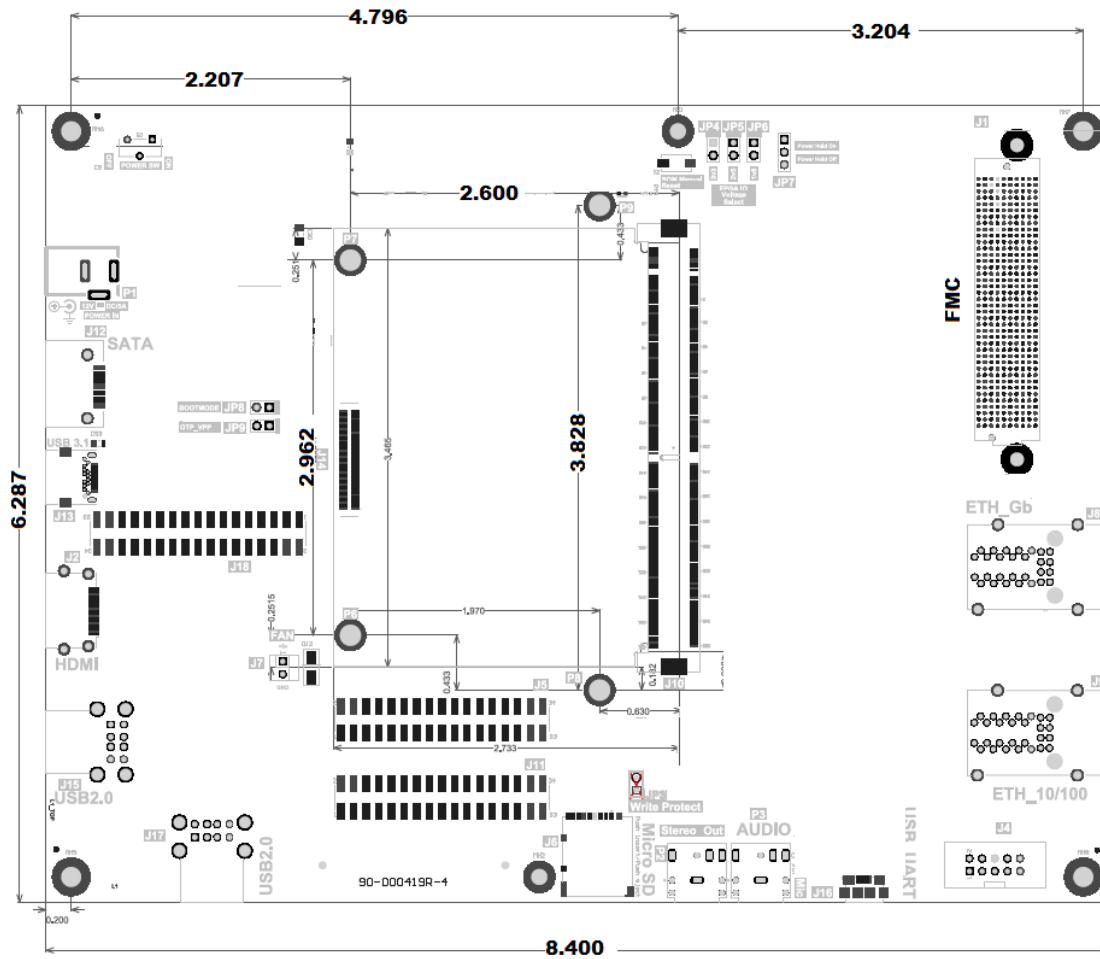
MitySOM-AM57(F) Development Kit Outline and Mounting Hole Locations (Top View, inches)
